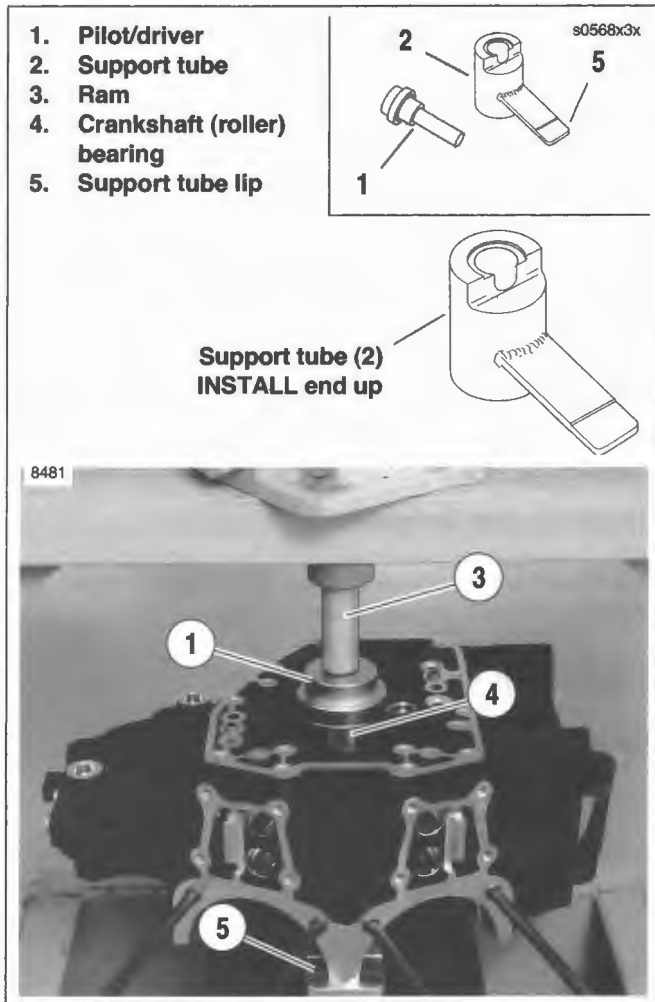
Right Crankshaft (Roller) Bearing Installation
